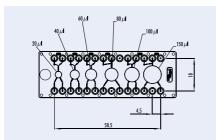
Drawing of micro mixer chip with mixing chambers Fluidic 286 with Mini Luer interfaces
